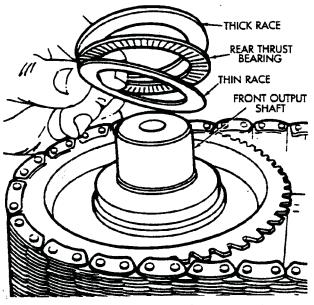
Install Front Output Shaft Rear Thrust Bearing and Races
